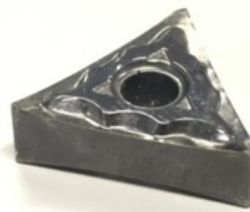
An image of the Kyocera TNNG carbide cutting tool.
